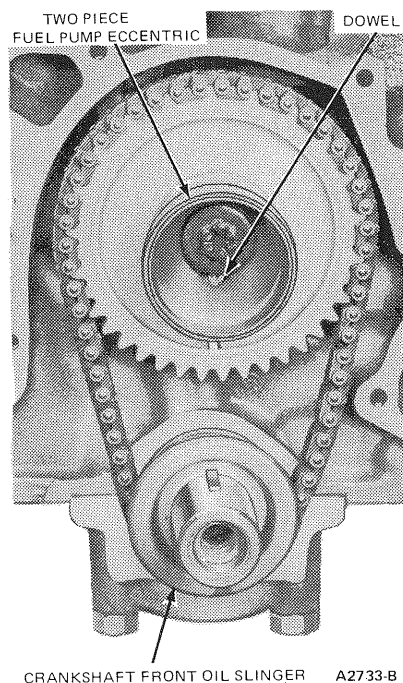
Fuel Pump Eccentric and Front Oil Slinger Installed
